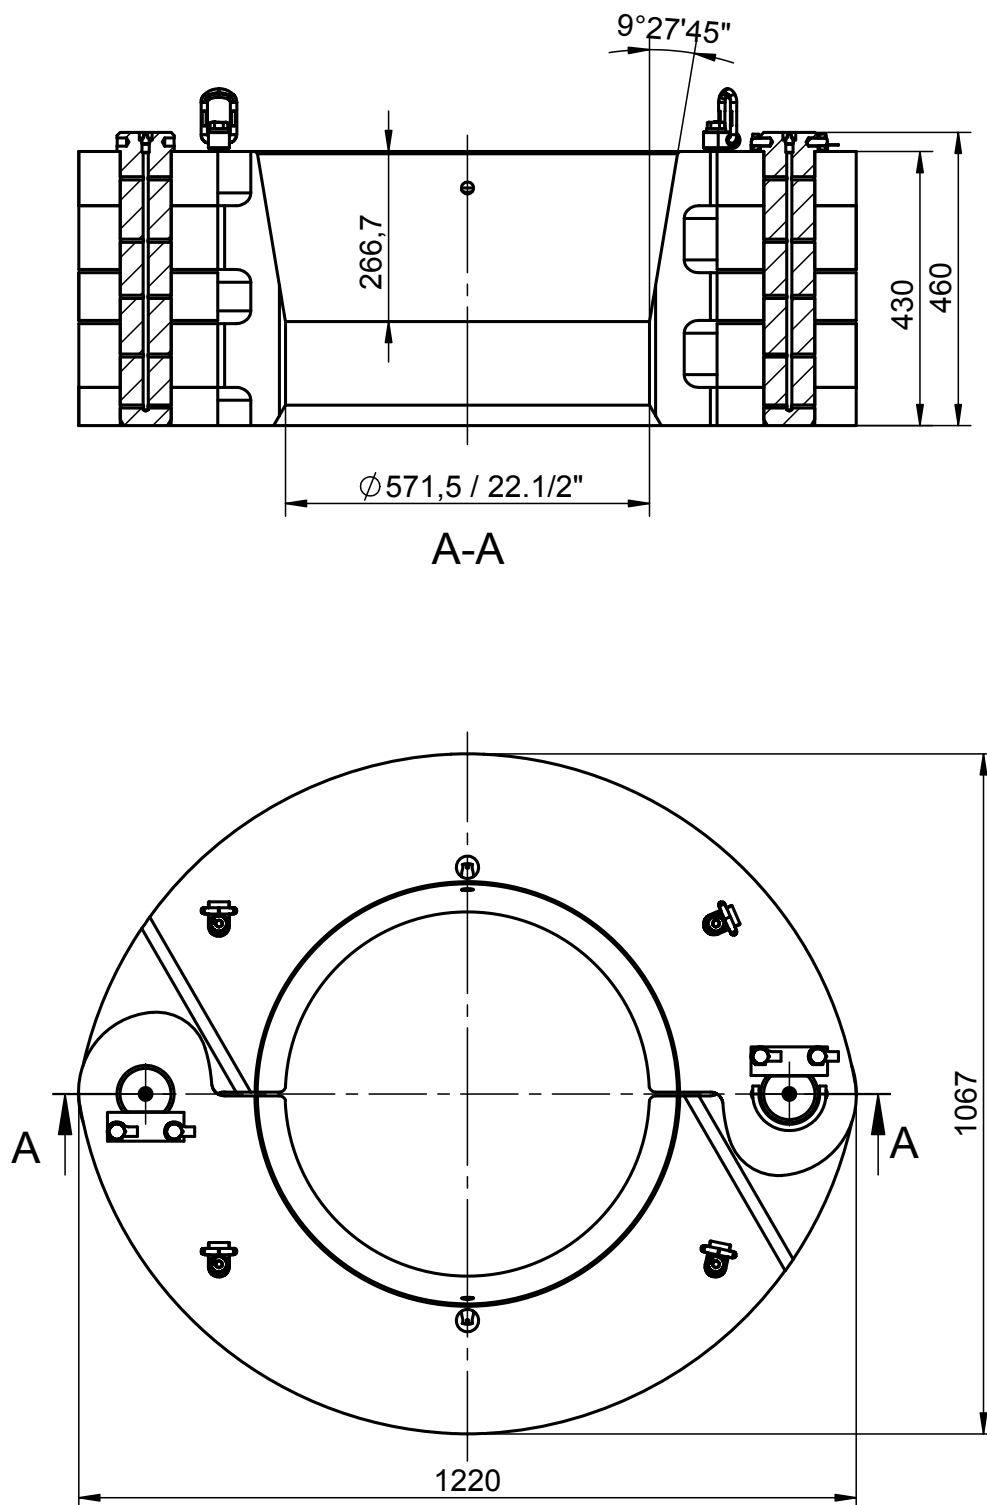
Principle drawing of a HCS 500-20" main dimensions
